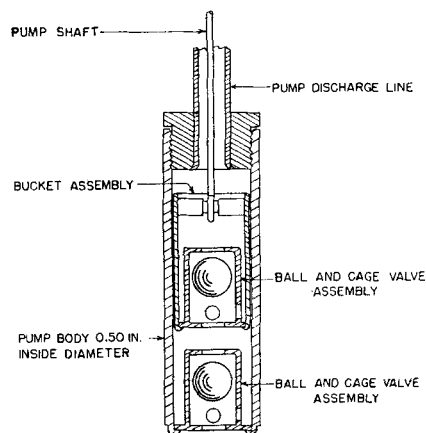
Bucket pump used in six-stage vapor-liquid equilibrium unit. The entire pump has been fabricated from 18-8 type 304 stainless steel without soldering or welding.
